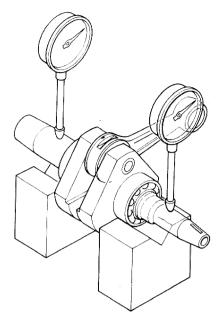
Connecting Rod Large End Radial Clearance Inspection
